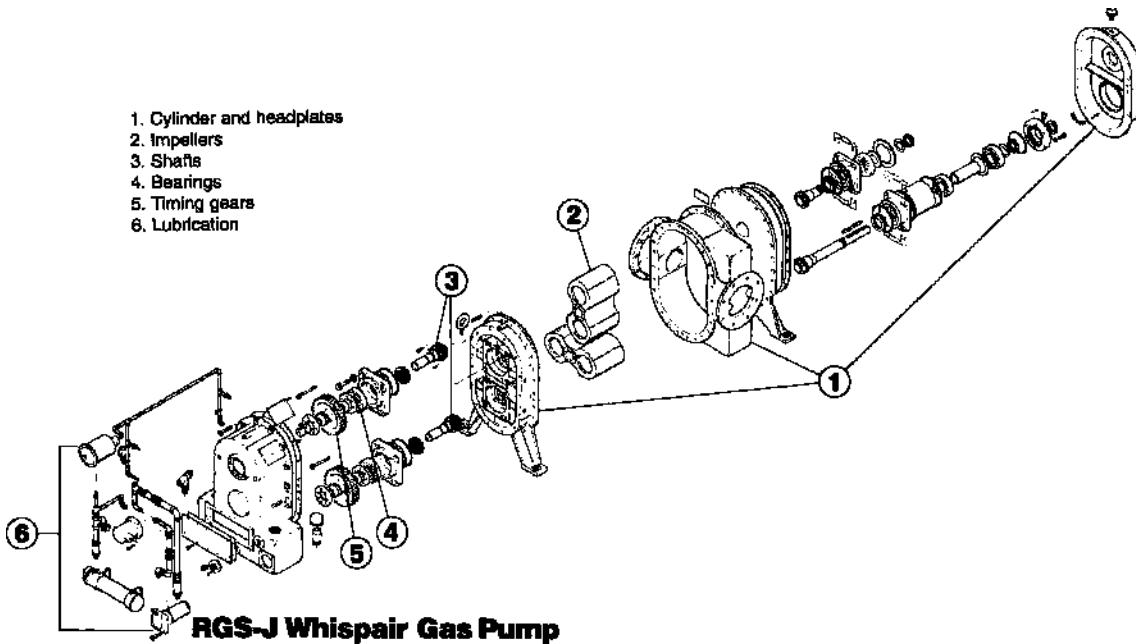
Cut-away view of internal assembly of rotary lobe vacuum pump. (By permission from Tuthill Corp., M.D. Pneumatics Division.)
